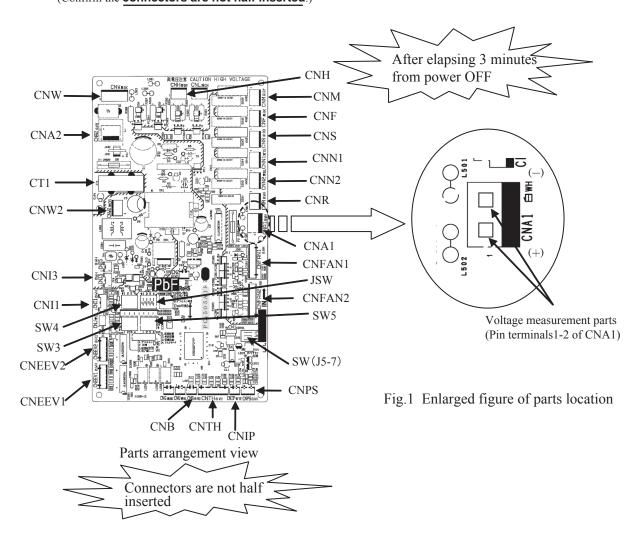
Parts arrangement view (Parts face of PCB (Main))
